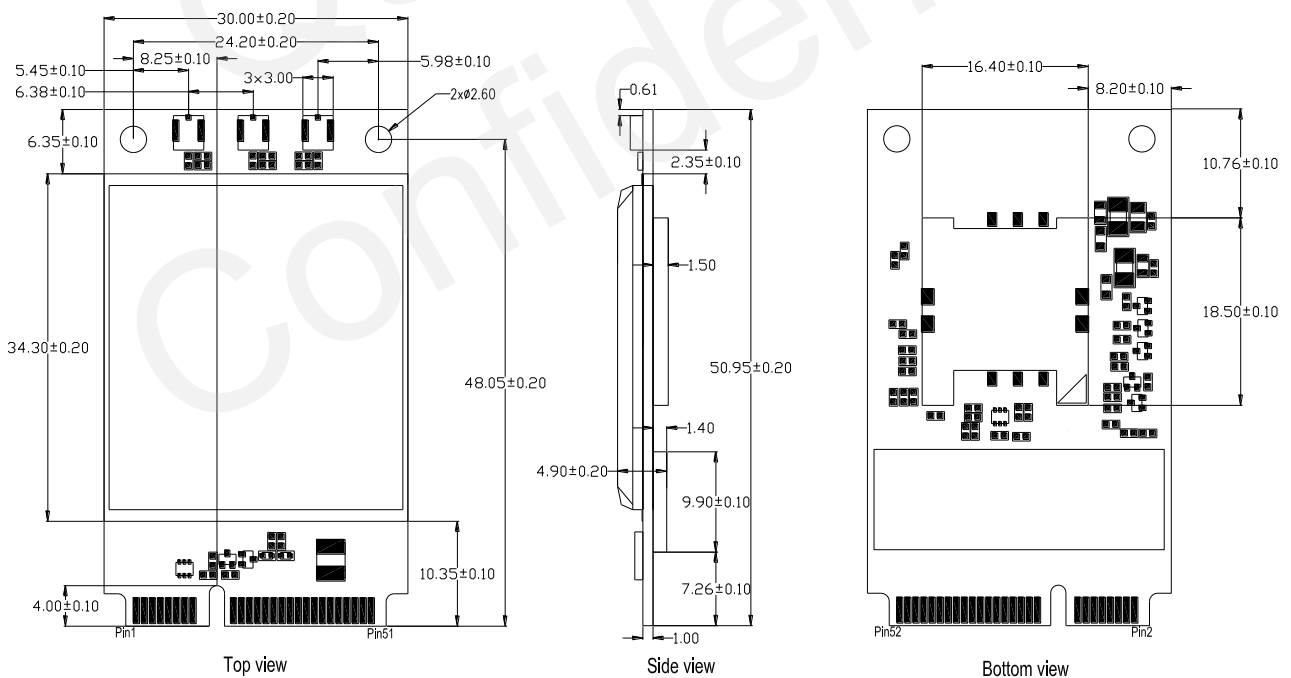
Mechanical Dimensions of UC20 Mini PCIe (Unit: mm)
